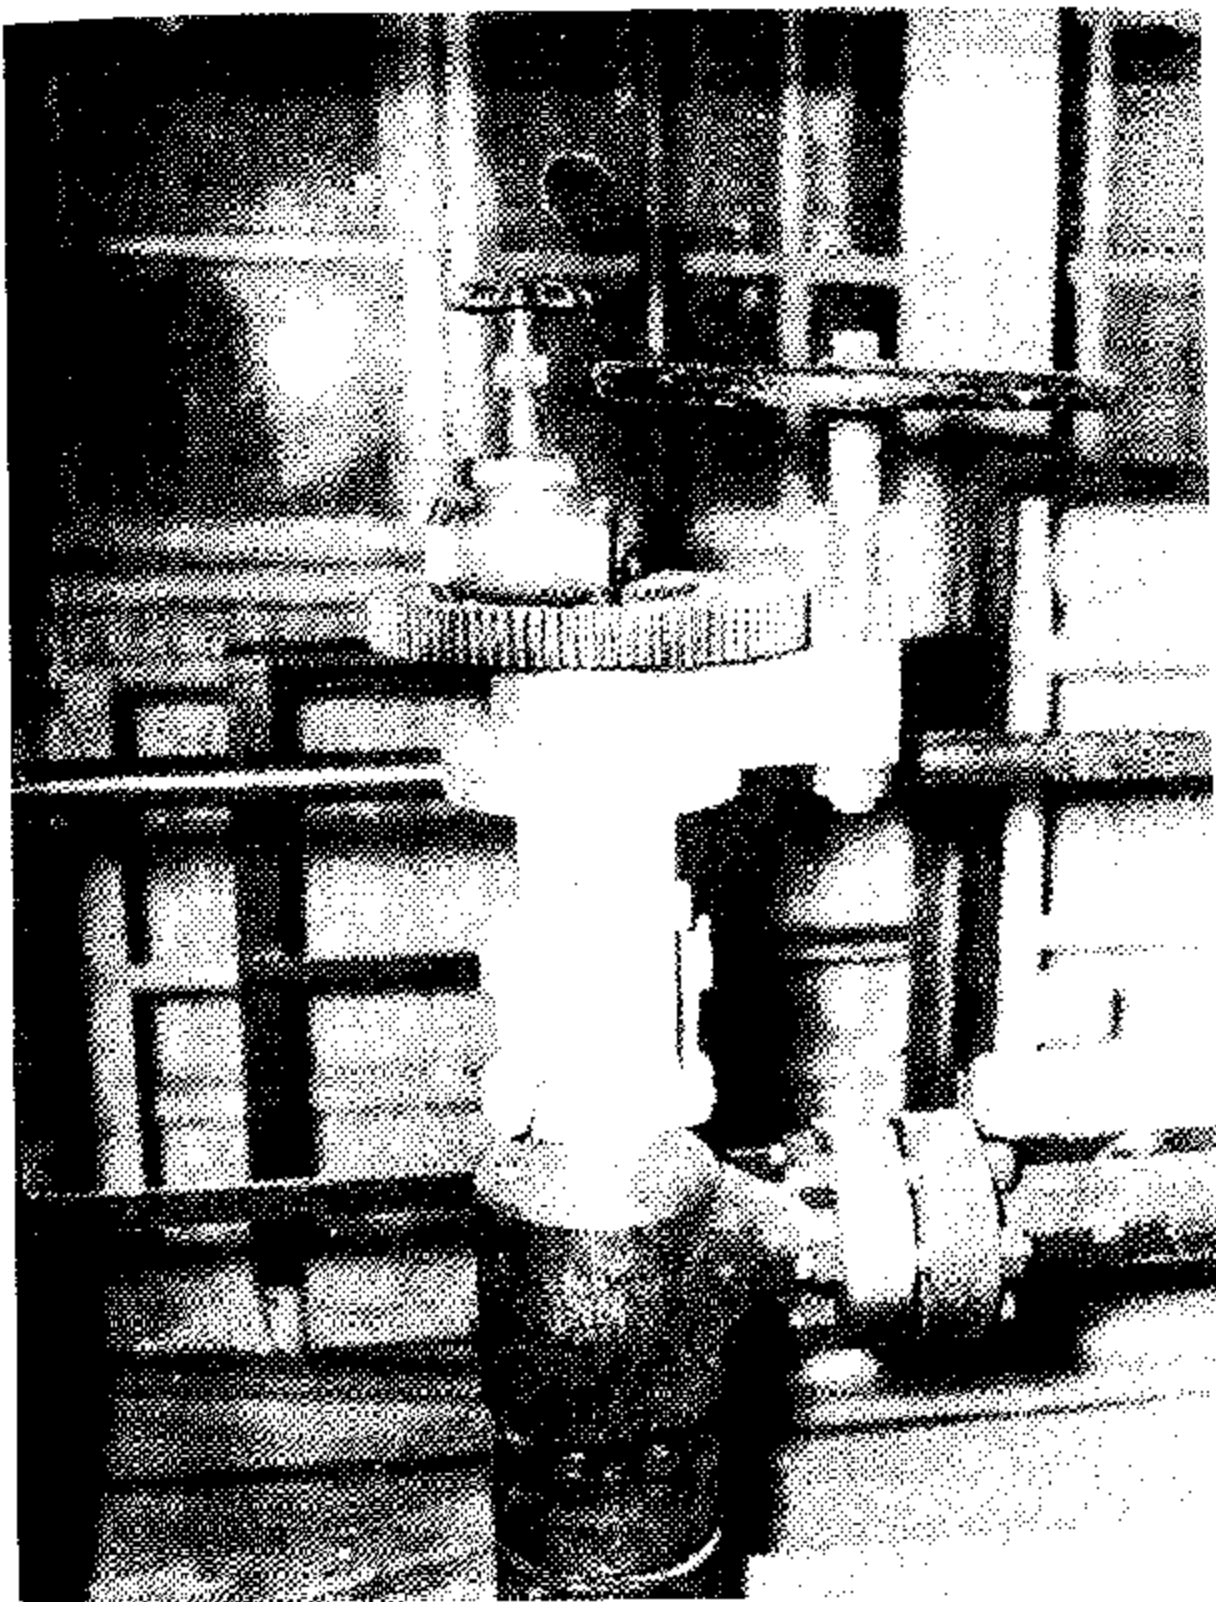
Close-up of 2-1/2-inch high-pressure valve. Note comparative size of standard 2-1/2-inch valve on top of hand-operated gear wheel.
